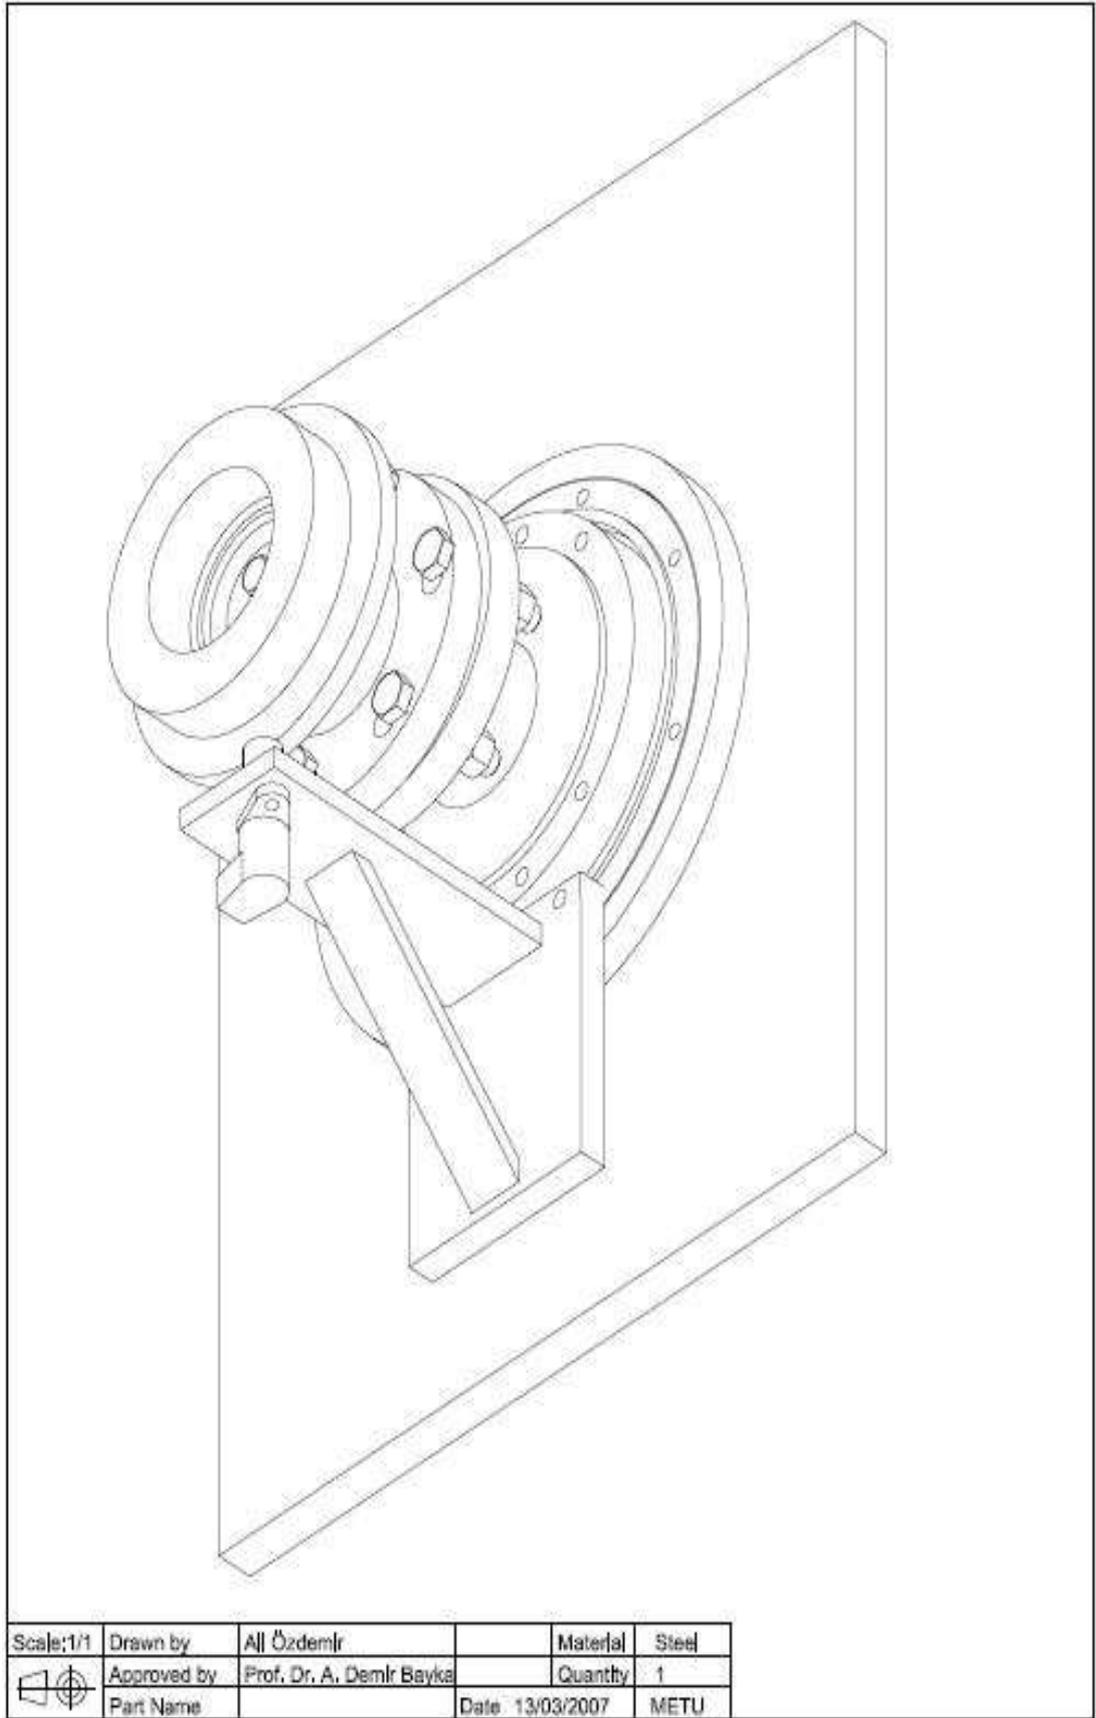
Assembly Drawing of the Engine Speed Sensor
